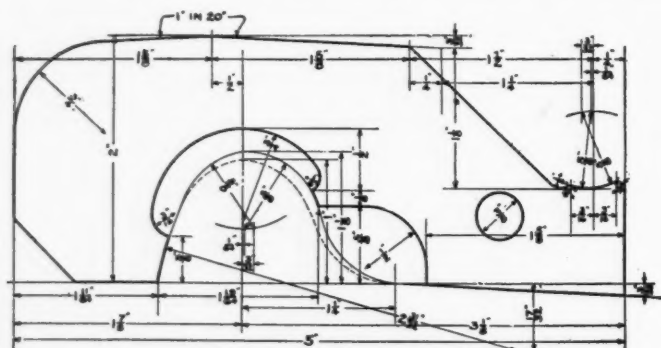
Maximum Flange Gage for Solid Steel Wheels.
